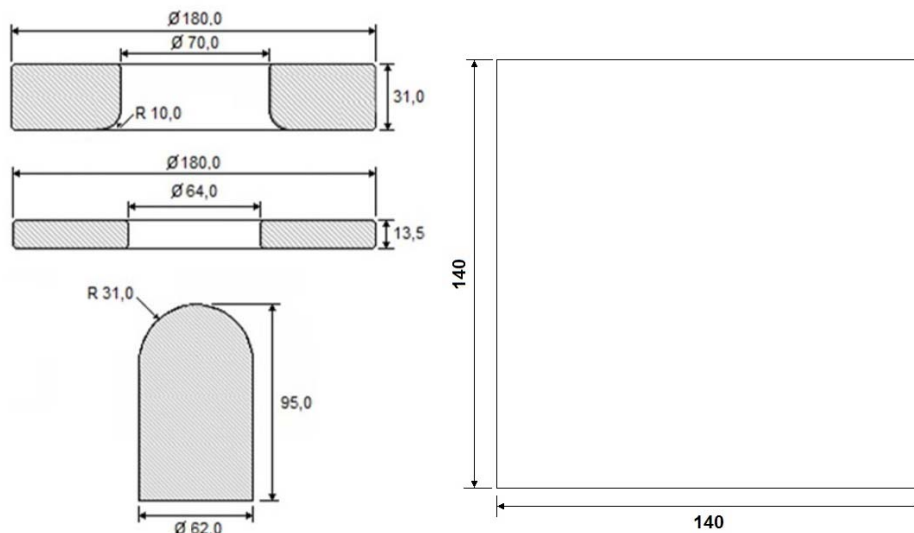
Nakajima test set-up section drawing with dimension in mm (left) and sheet sample for deformation with dimension in mm (right).
